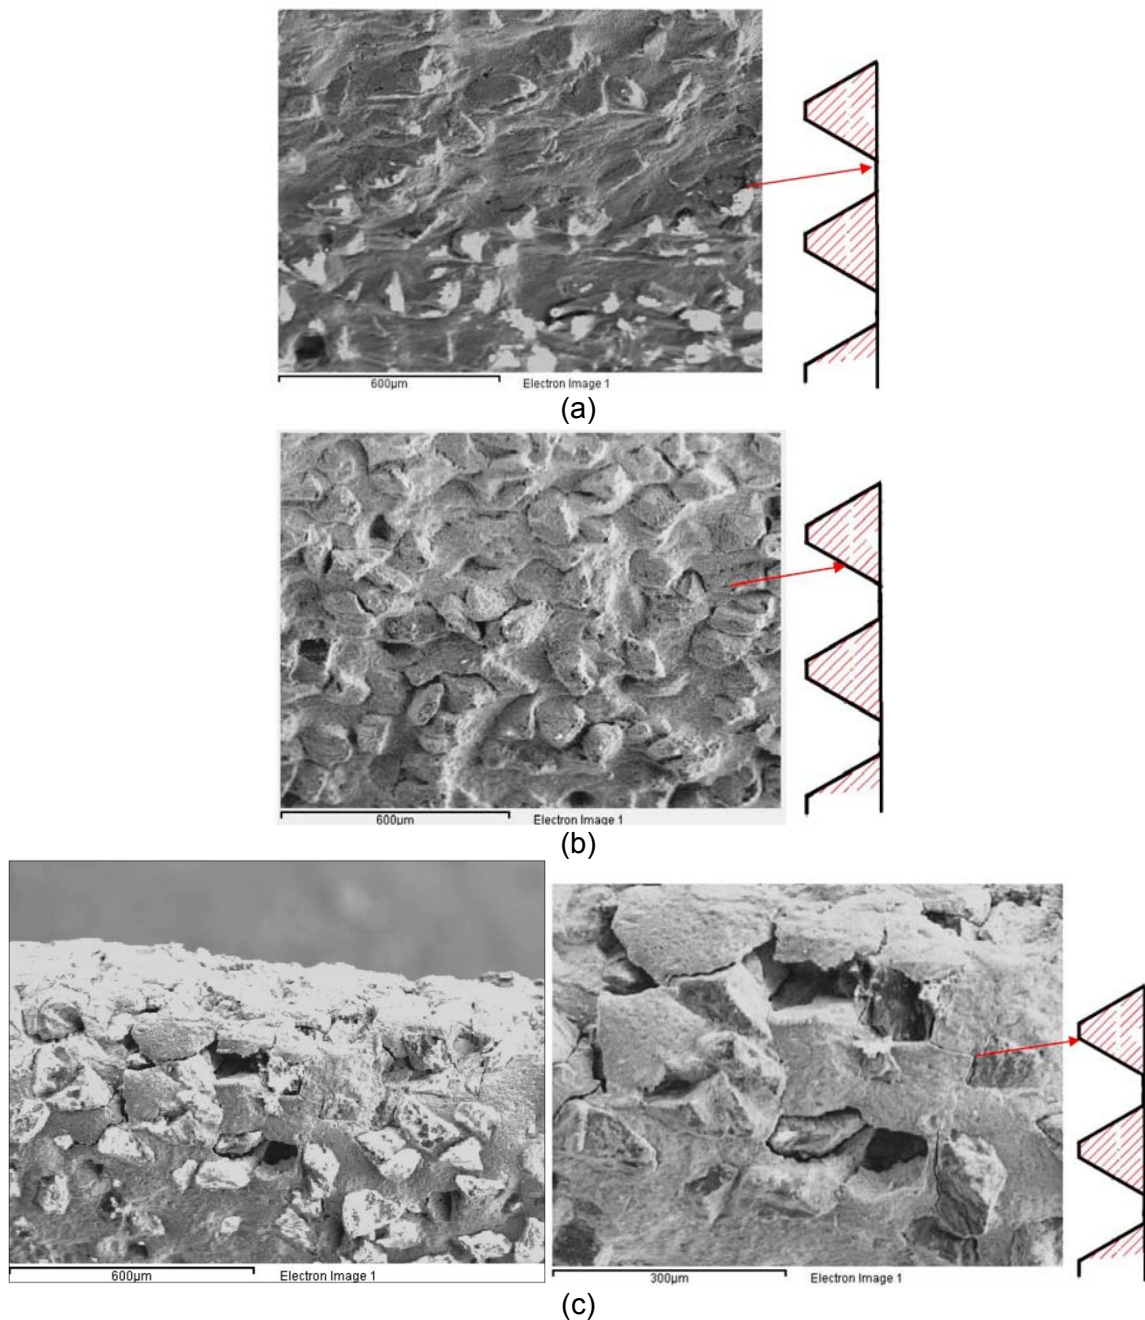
(a) Almost intact coating at the bottom of the thread. (b) The intermediate area of the thread presenting erosive wear, partial cracking and partial grain removal. (c) Tip of the thread presenting extensive cracking, erosive wear and grain removal from the coating's matrix.
